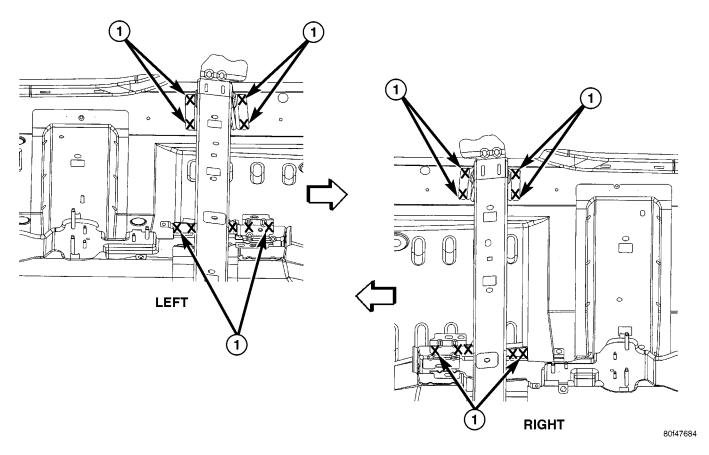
D.S.I. BEAM TO FRONT FLOOR PAN AND INNER SIDE SILL
